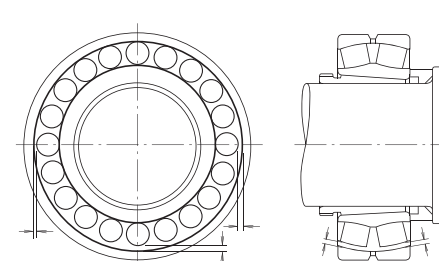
Measuring Clearance in Large Spherical Roller Bearing
